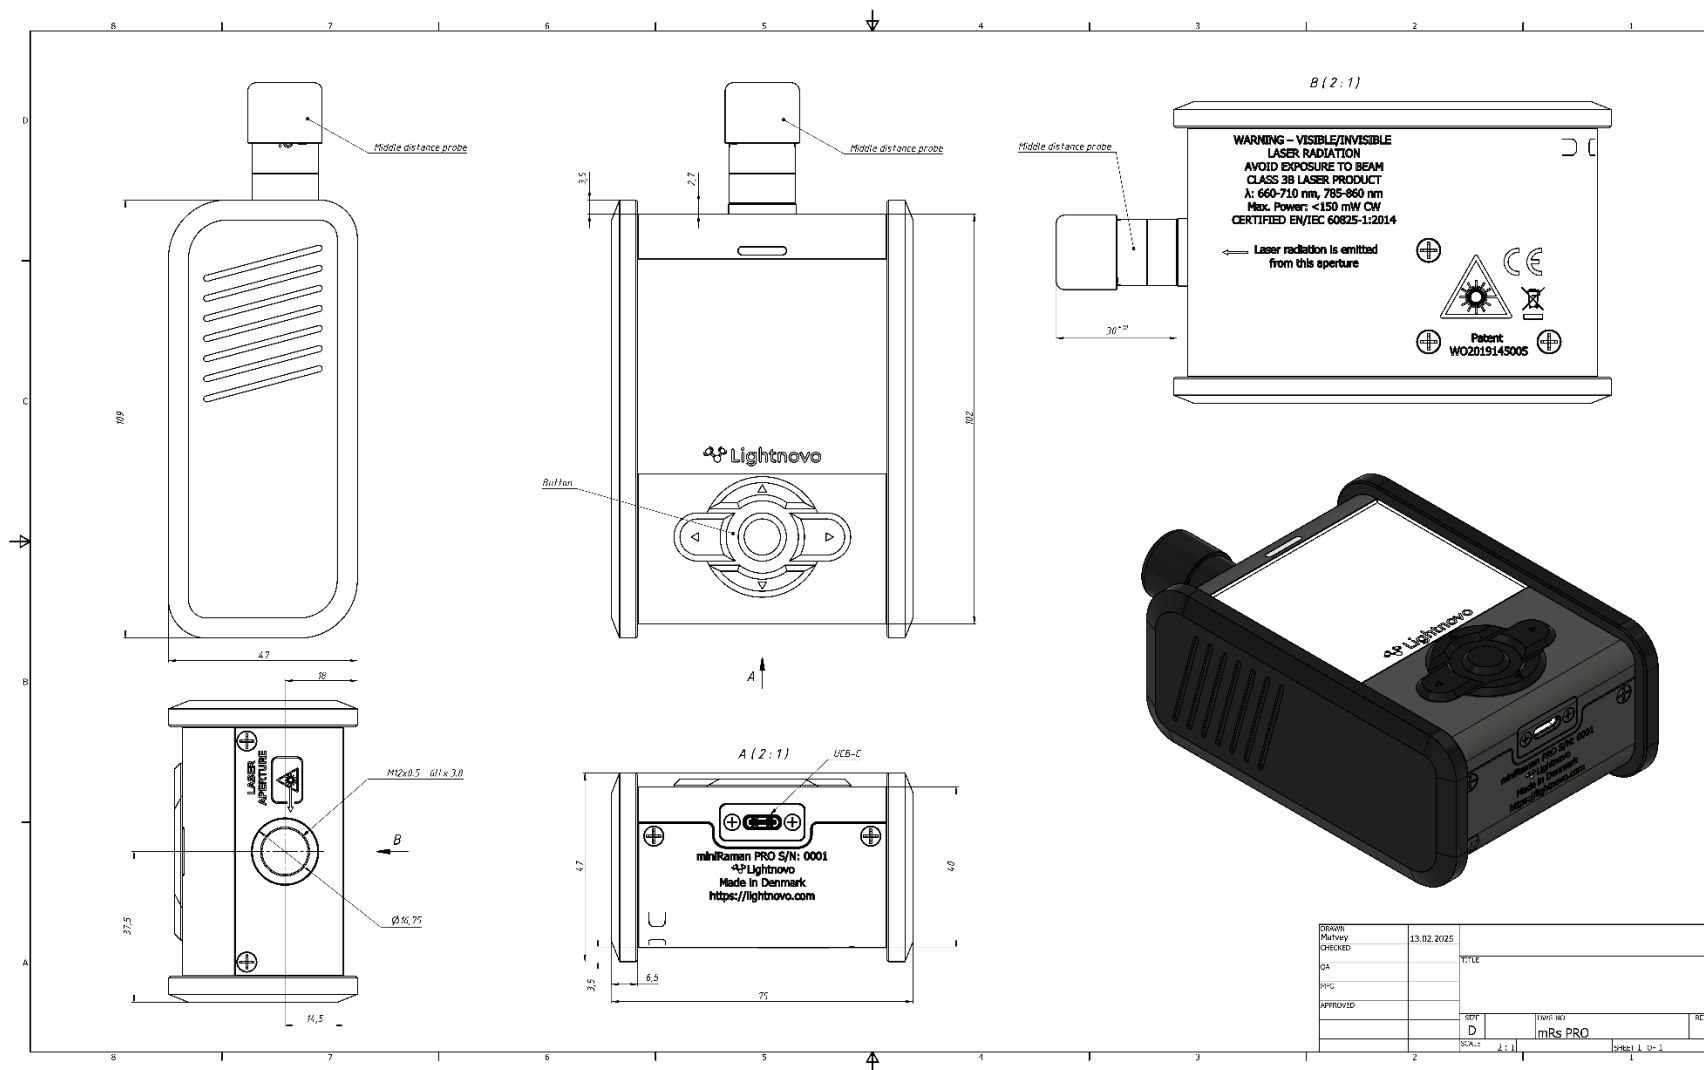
miniRaman Pro spectrometer drawing with dimensions
